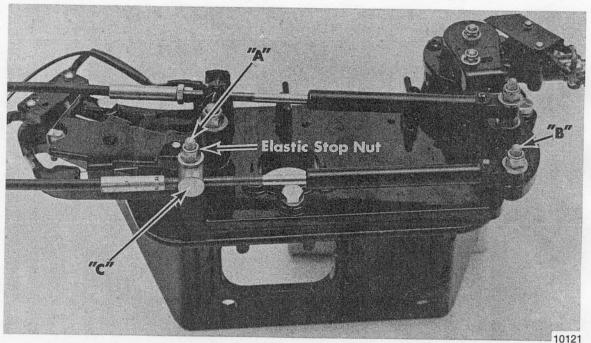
Shift Bracket Assembly (Removed from Engine for Clarity)
